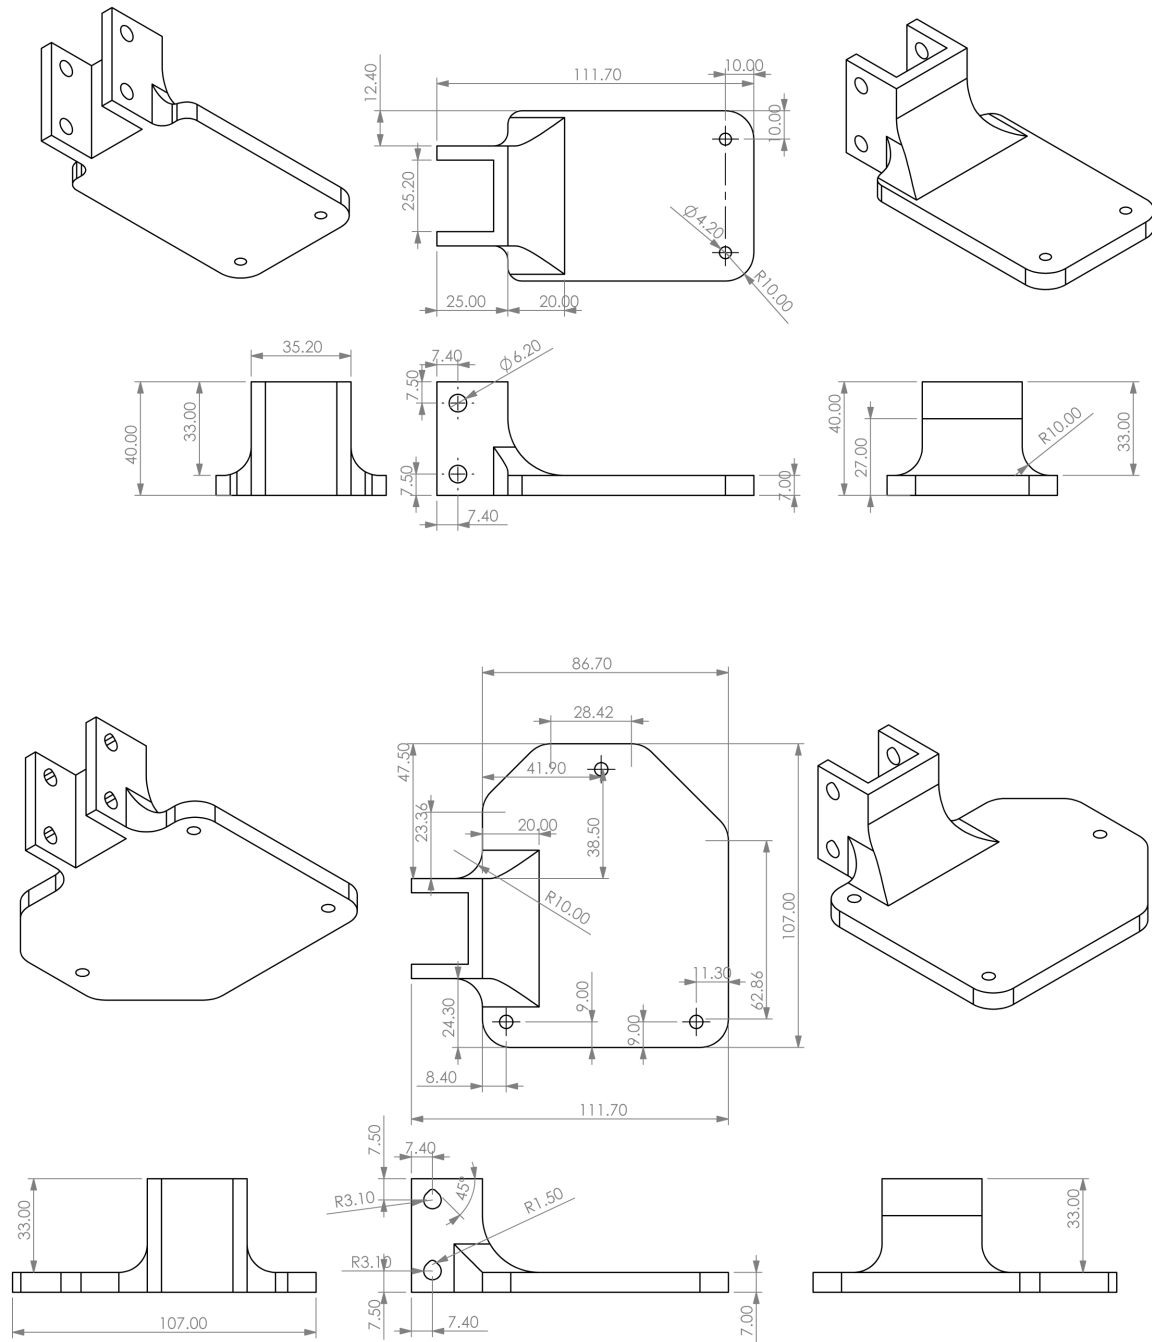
Upper drawing) Laser Holder for the OptoNCDT 1420. Lower drawing) Laser Holder for the OptoNCDT 1750. Both are custom designed and 3d Printed.
